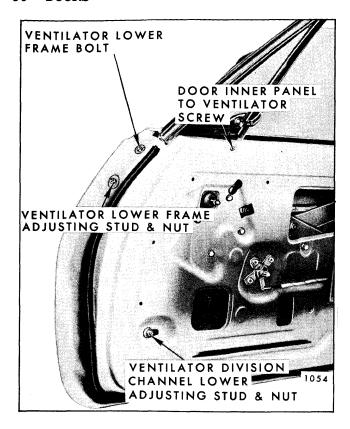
Front Door Ventilator Attachments - "Z" Styles
